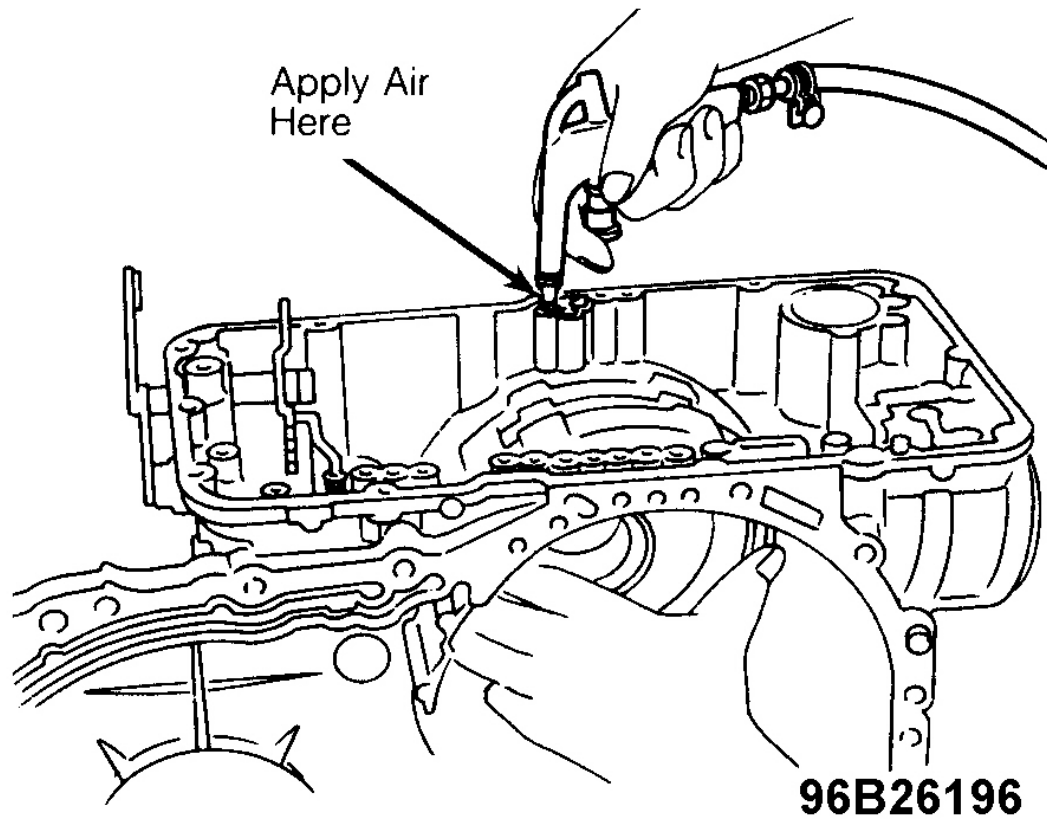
Removing & Checking Low-Reverse Brake Piston
